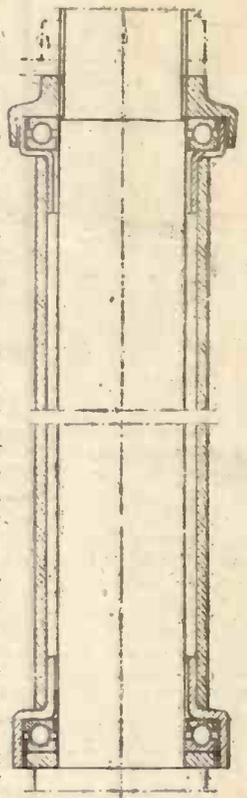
Section of a steering column, showing how the ball bearings are fitted.
